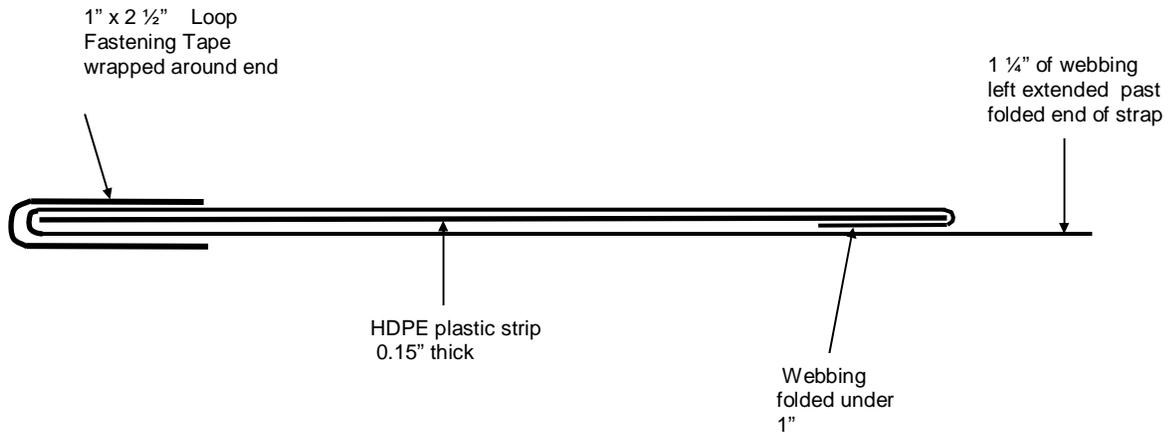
PALS Webbing Attachment Strap - Cross Section
